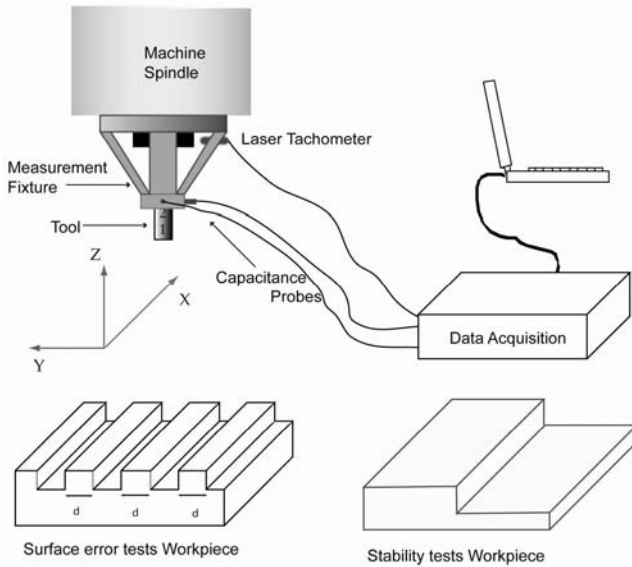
Schematic of test setup and machined blocks used for stability and surface location error tests.
